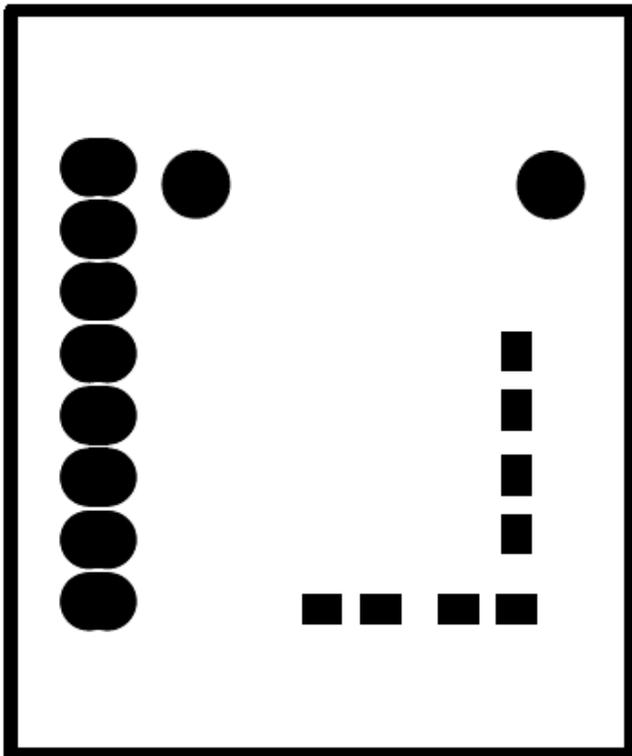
SFH7050 Sensor Board Bottom Solder Mask
